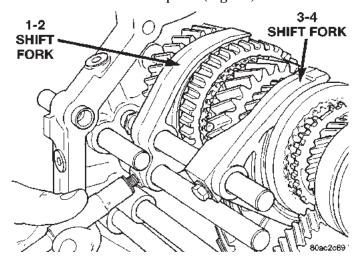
Remove Shift Fork To Shift Rail Bolts
